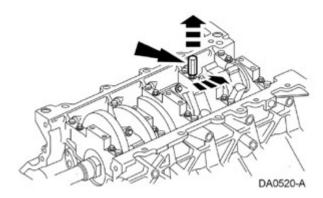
Removing Oil Pump Screen And Pickup Tube Spacer Courtesy of FORD MOTOR CO.
